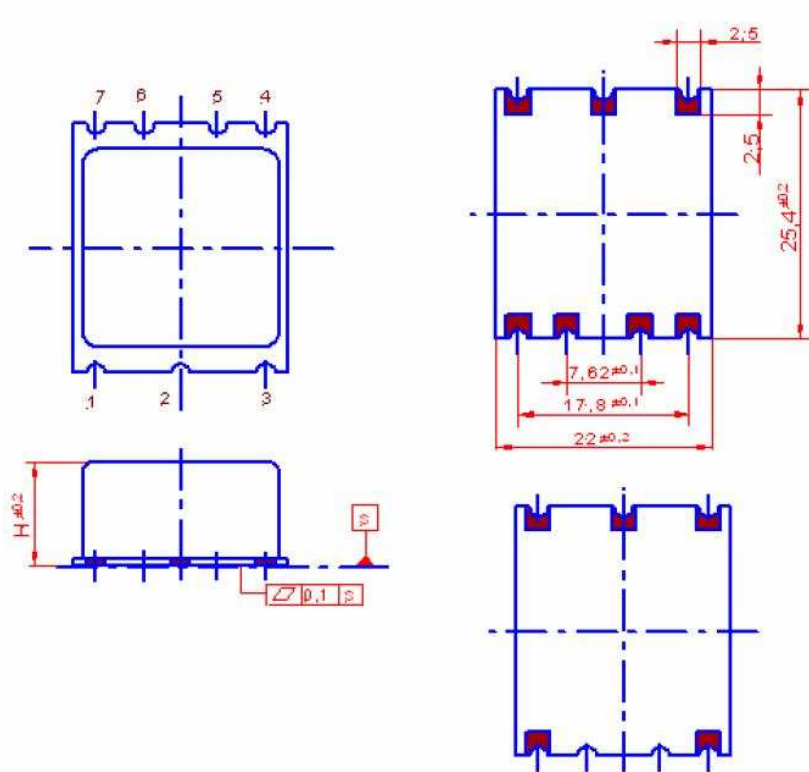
Mechanical drawing of Stratum 3E SMT OCXO
